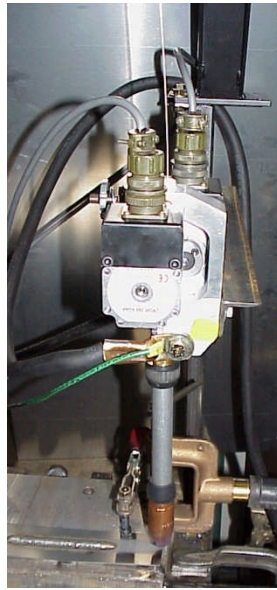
Miller Jetline CSC Gun Showing Dual-Wire Drive Motors
